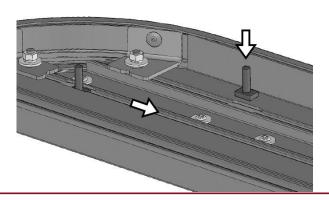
Attach passenger/right rear Bracket to Bolt Plates
